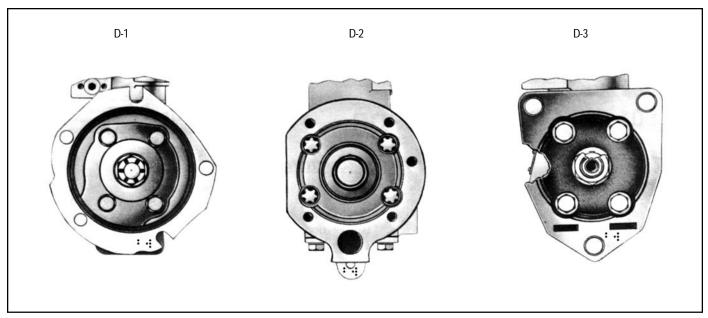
VARIOUS COMPRESSOR MOUNTINGS
